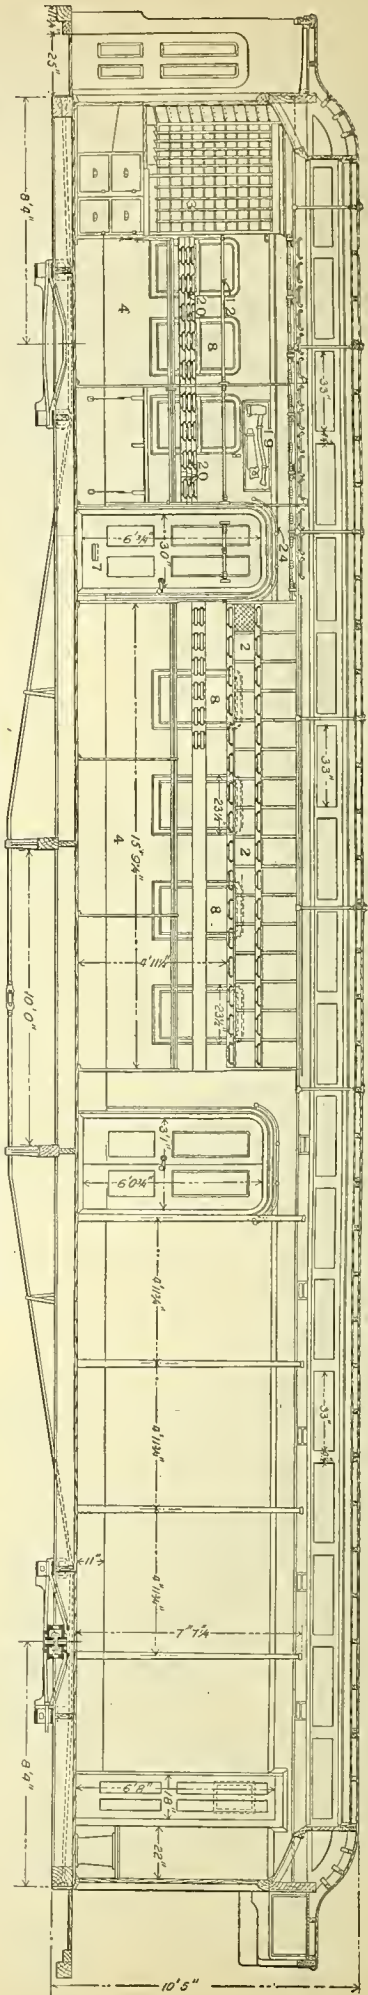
Sectional Side Elevation, Showing Arrangement of Interior.
